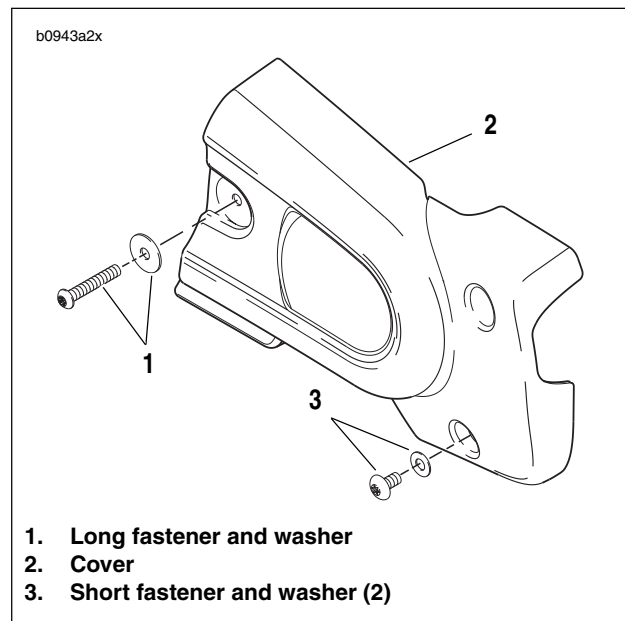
Chin Fairing Assembly, Right Rear Fasteners
